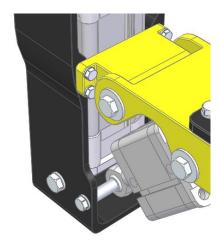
Fastened shafts supporting the angled cylinder and the vertical cylinder
